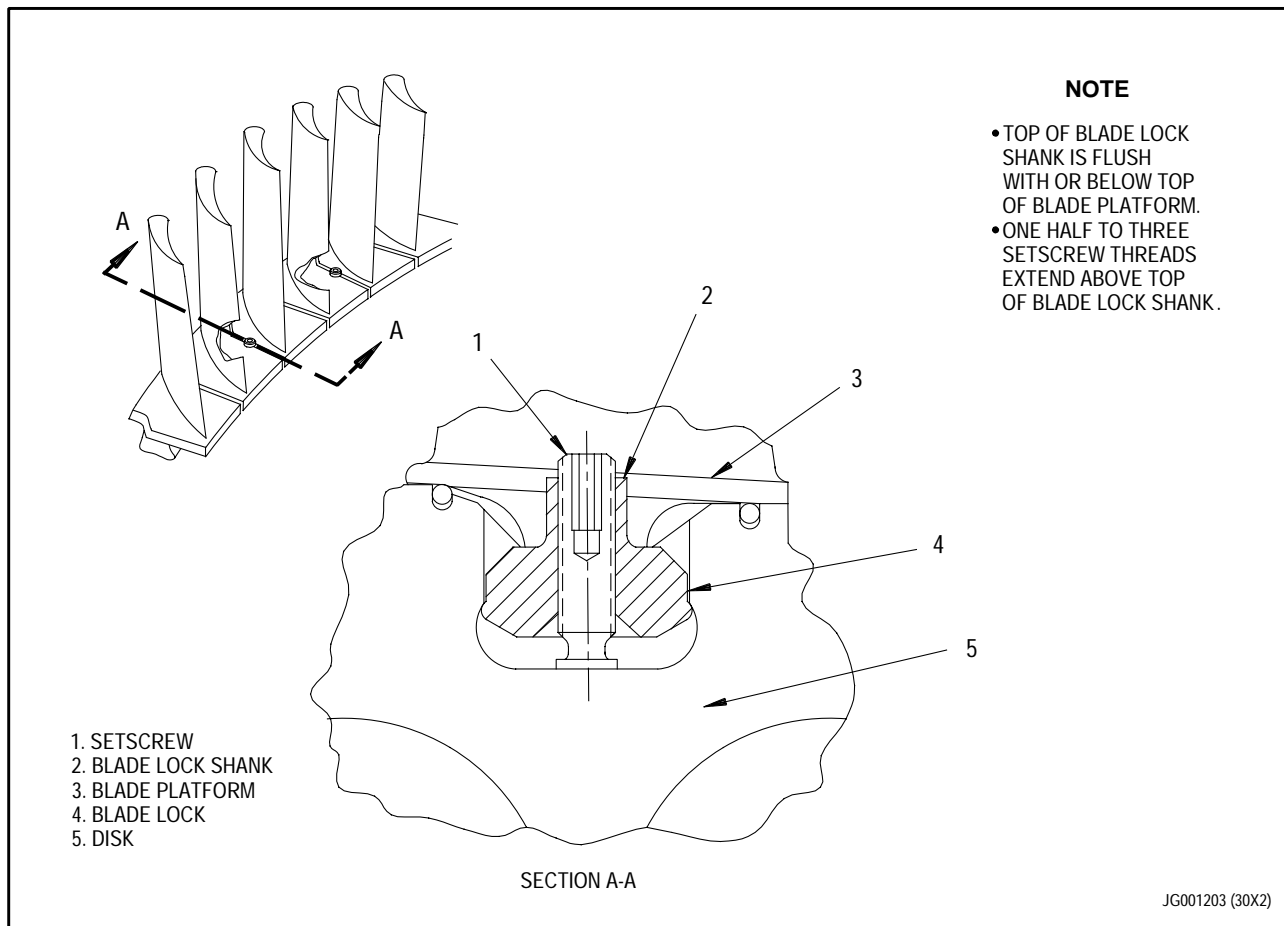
Compressor Rotor Blade Lock - Installation (Typical)
